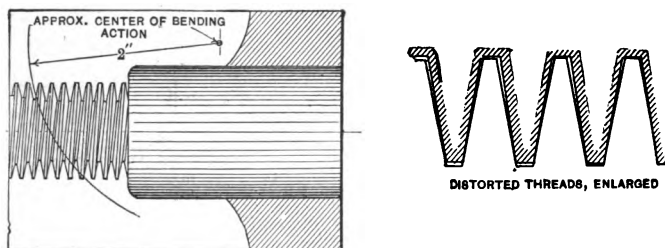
Spring Screw Die with Special Threads, and Result of Adjustment
